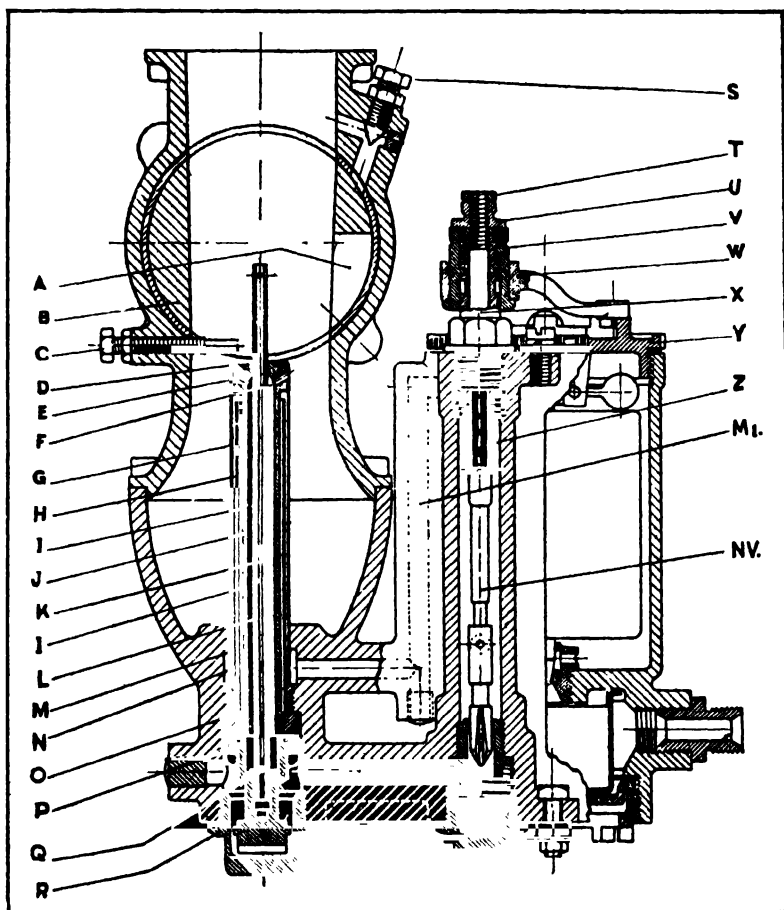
Part Sectional View Showing Construction of Claudel-Hobson Carburetor Used on Cirrus Mark II Engine.
